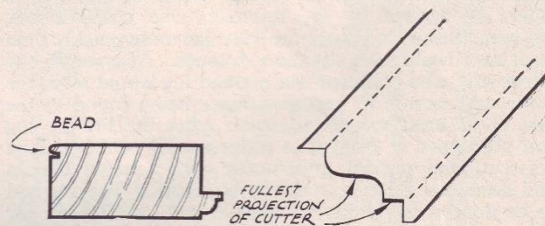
(left). SMALL BEAD TO ALIGN WITH BUTT HINGE
